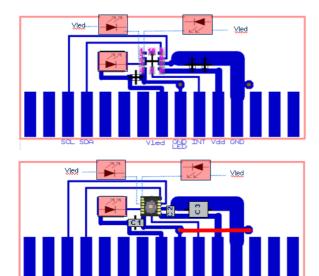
Sample demo board pcb design (top) and component placement (bottom) for operating the SFH 7770 E6 with up to three LEDs.
